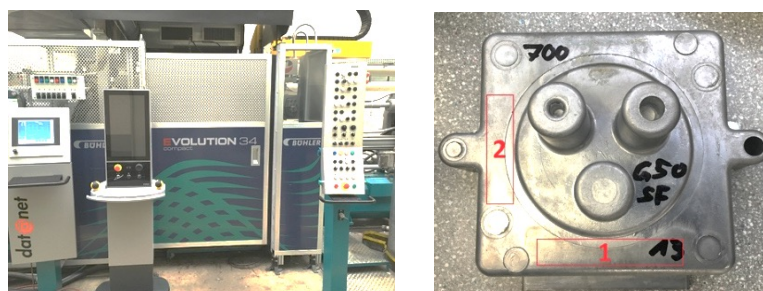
The die casting machine and part used in this study (Courtesy of Bühler, Switzerland).
